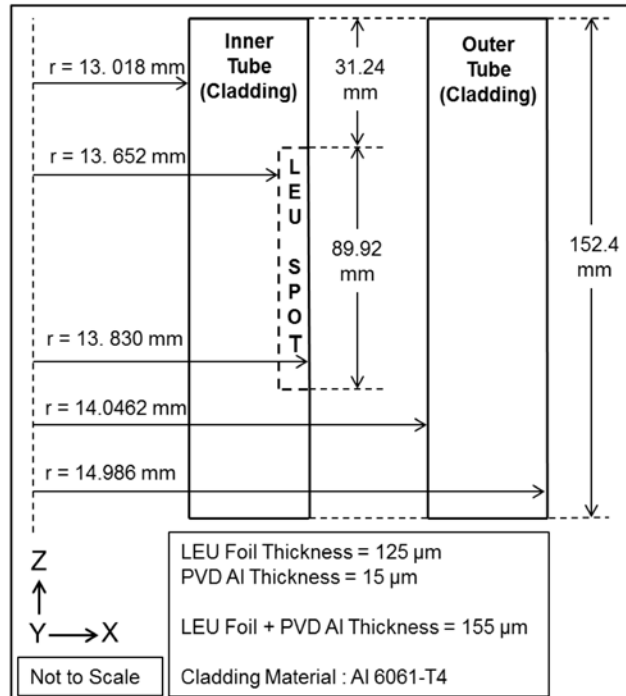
Pre-assembly annular target dimensions for HFIR irradiation.
